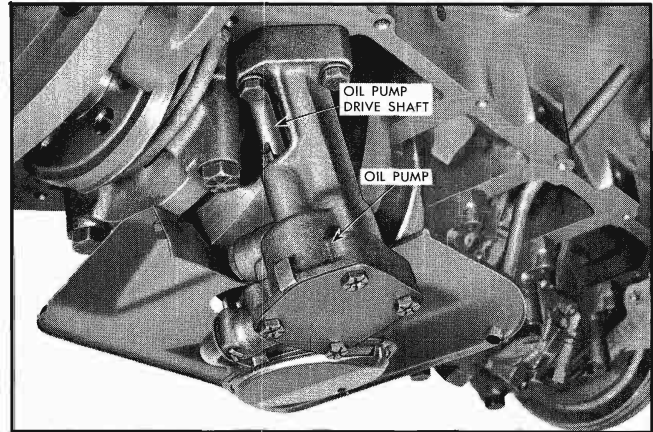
Oil Pump and Oil Pump Drive Shaft
